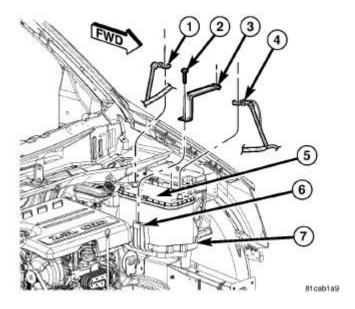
Battery Cables Courtesy of CHRYSLER LLC
